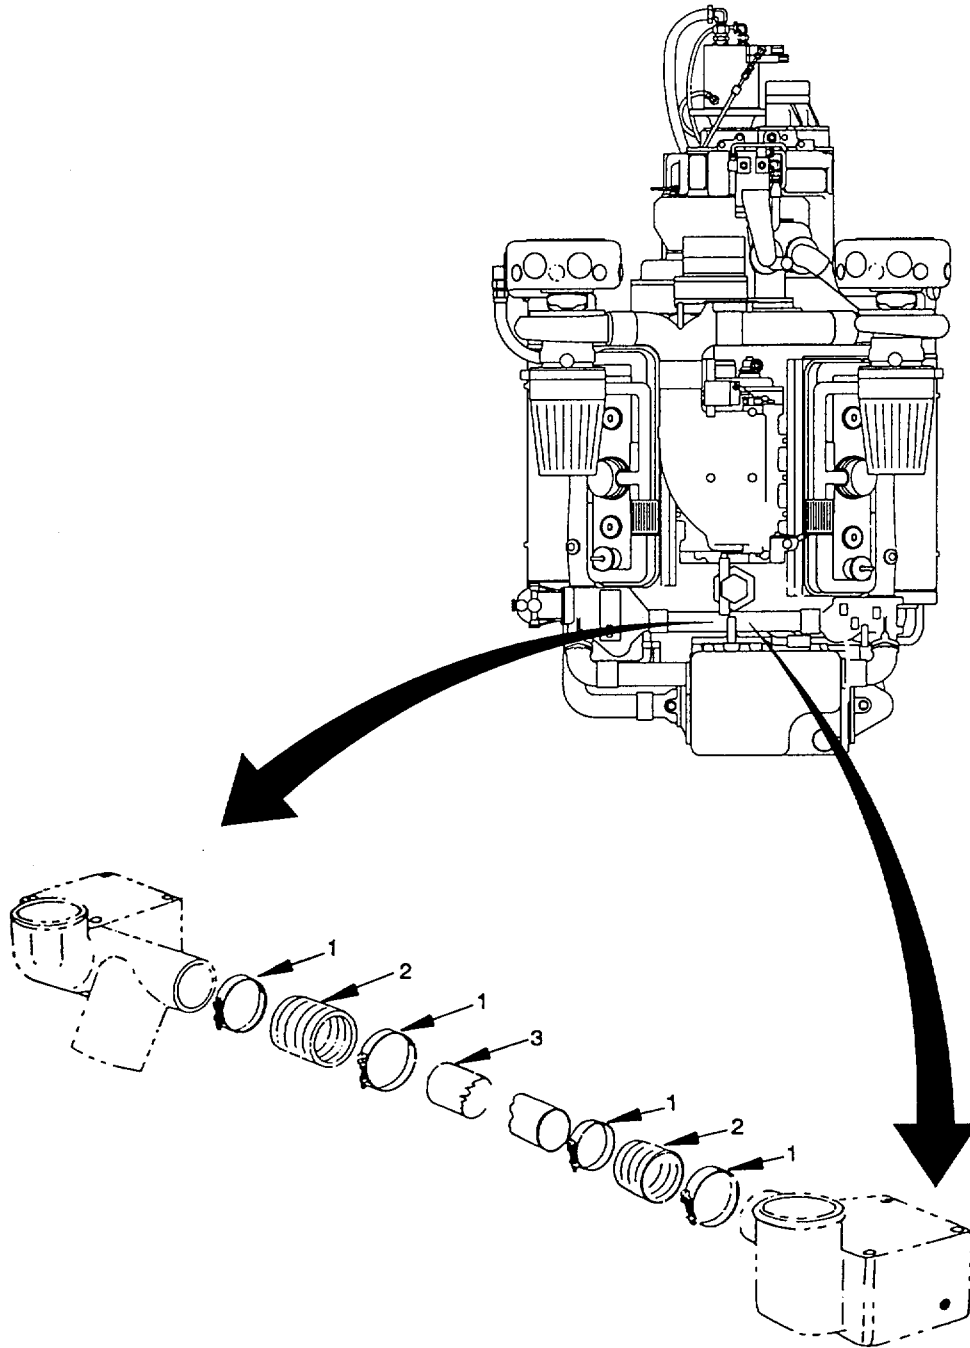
Water Bypass Tube, Diesel Engine, Remove/install
